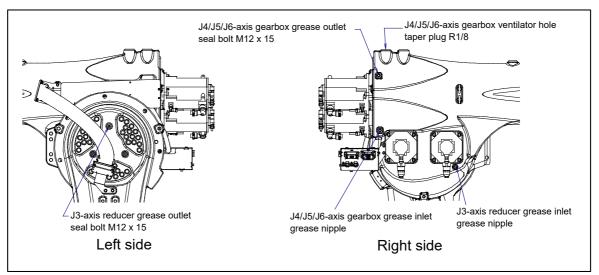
(b) Replacing grease of J3-axis reducer and J4/J5/J6-axis gearbox
